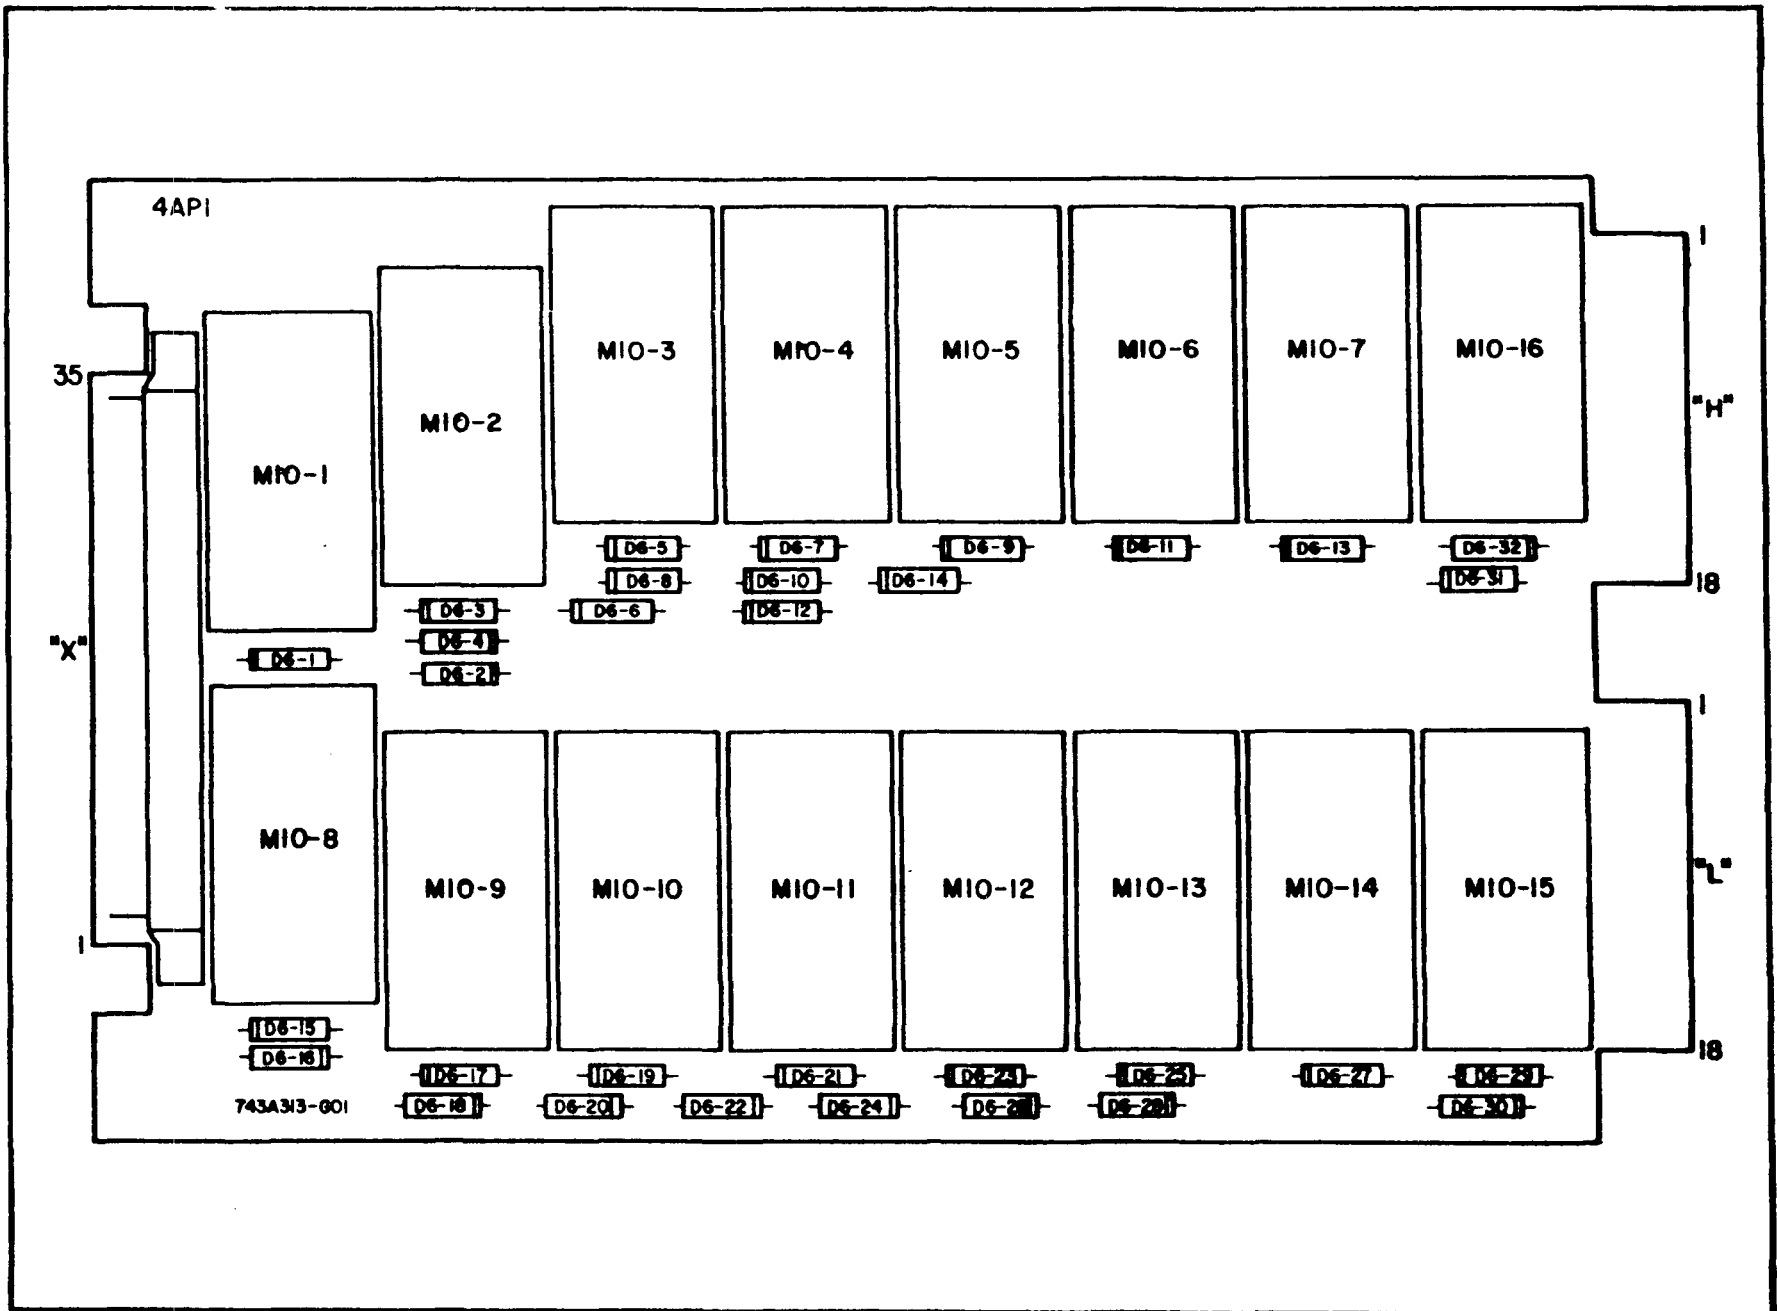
4API ASSEMBLY (REF. DWG. 743A313, SUB 2)
